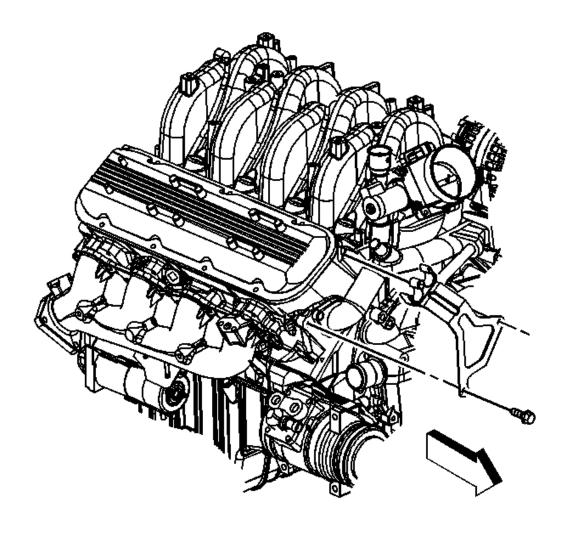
View Of Heater Hose Bracket & Bolts Courtesy of GENERAL MOTORS CORP.
